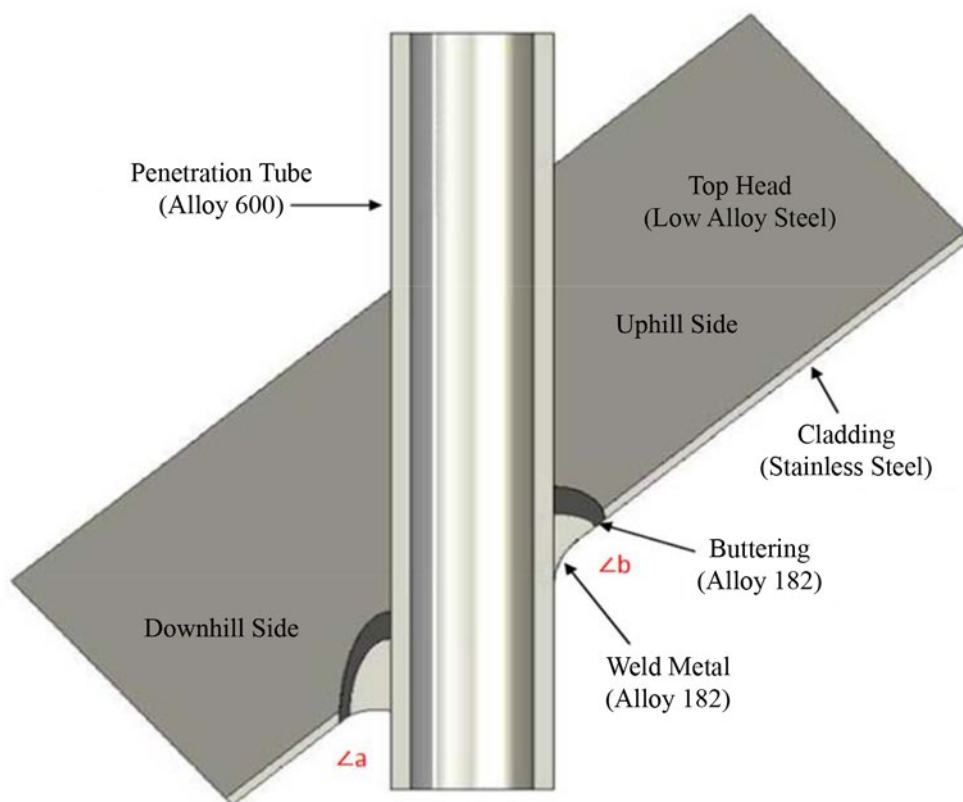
Control Rod Drive Mechanism Penetration-Nozzle Assembly
